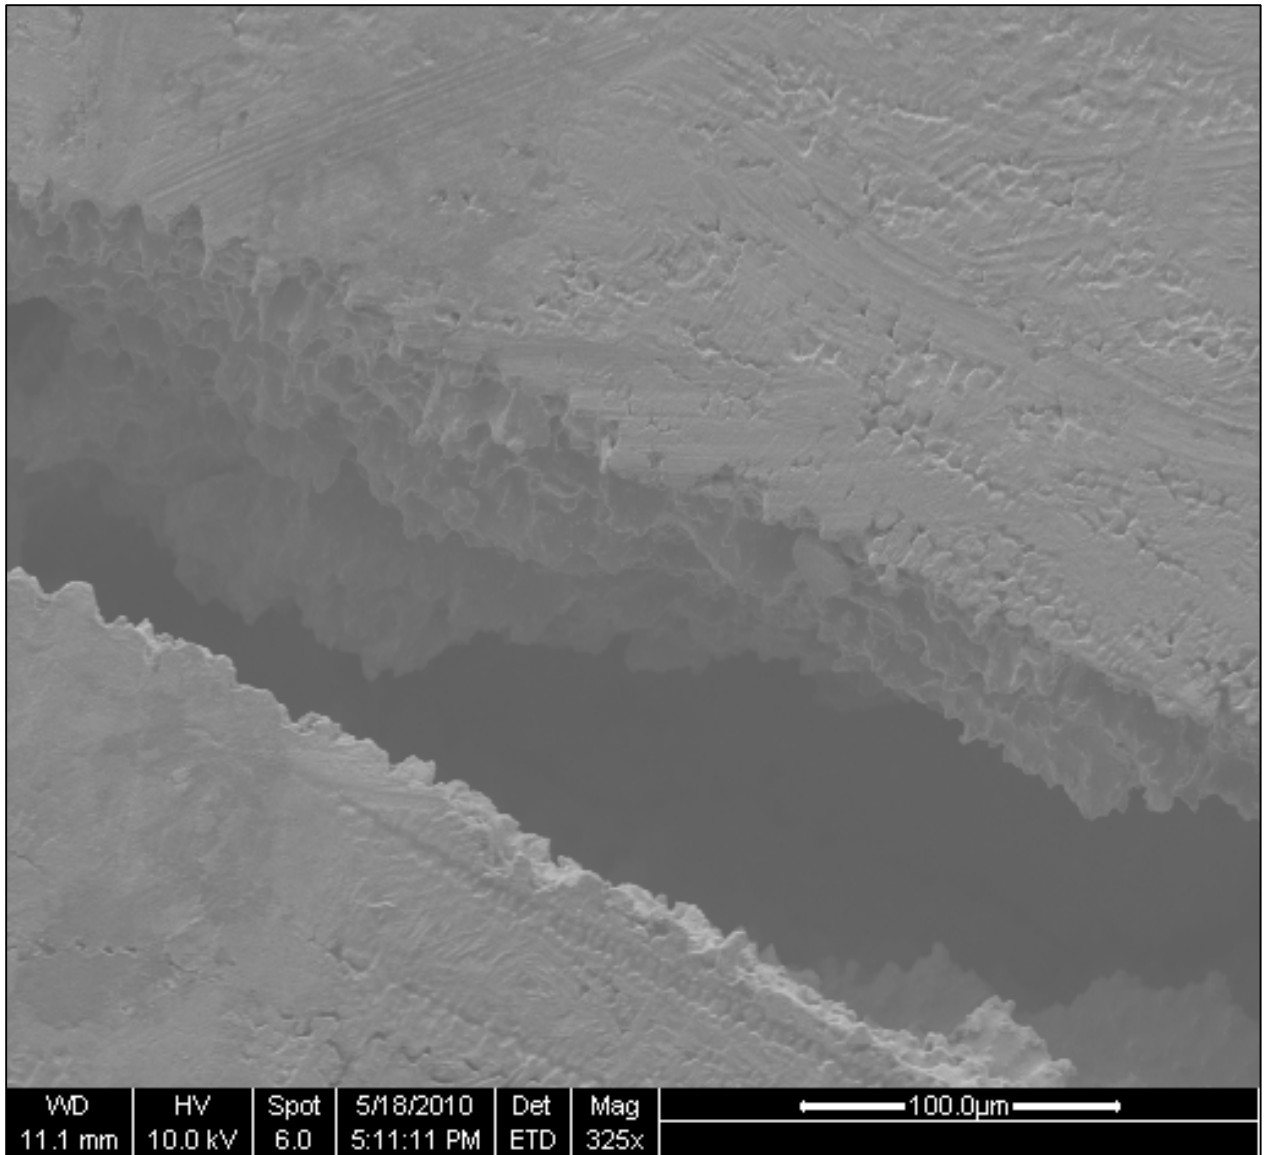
Solidification crack in the weld pool. Dendrite arms are visible along the fracture surface as well as the surface of the weld pool.
